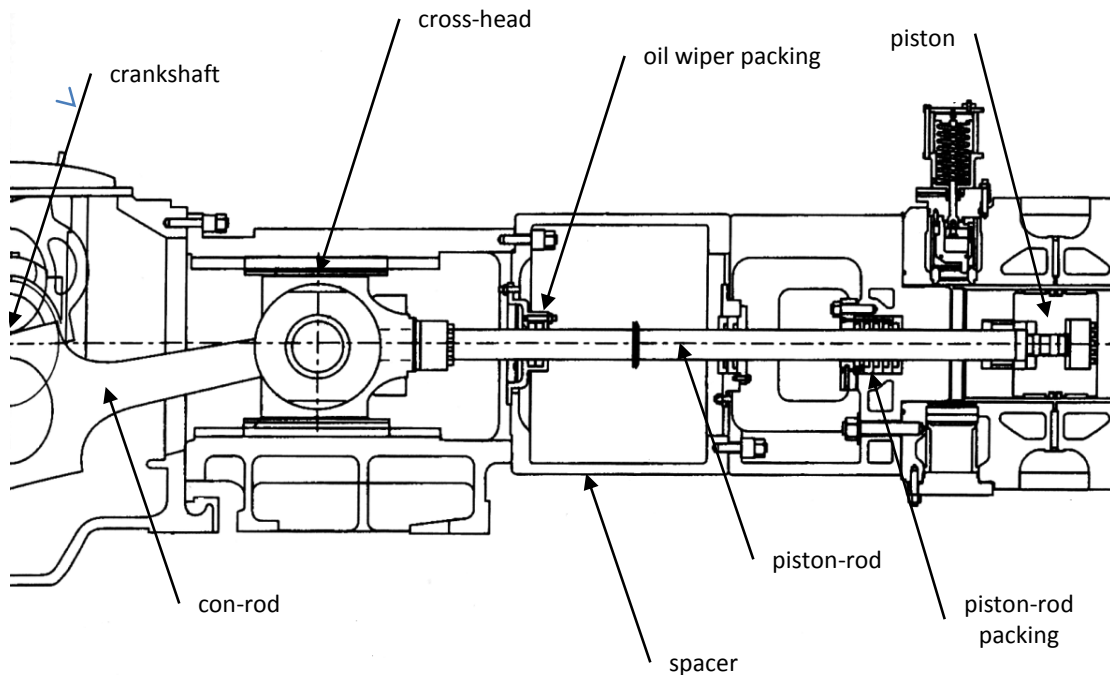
Typical set-up of an ‘oil-free’ gas compressor with the crankshaft and cross-head oil-lubricated on the left and the dry-running piston on the right. [173]
